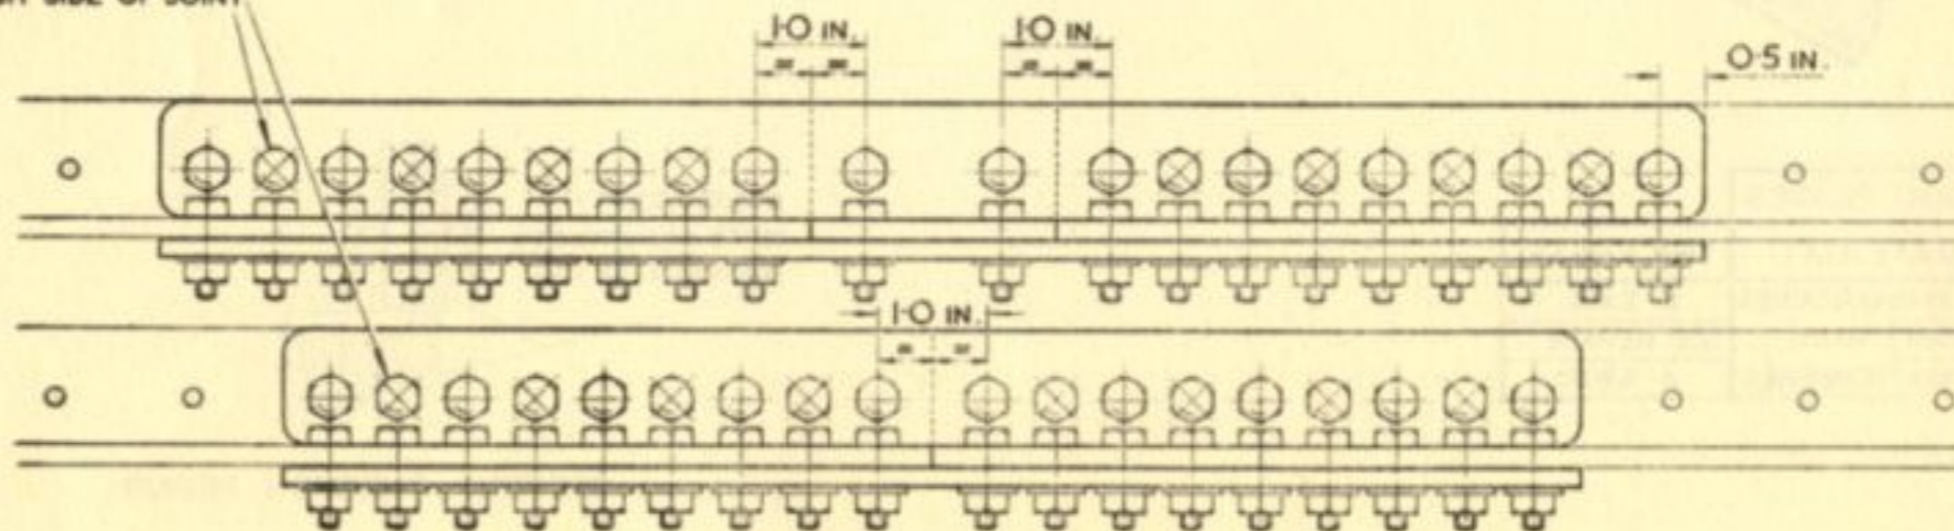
A. Skin repairs to fireproofing and jet pipe tunnels
